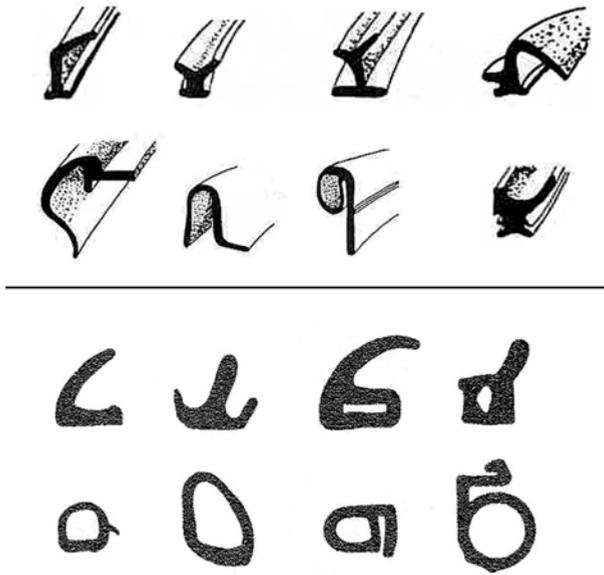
Examples of historical door weather strip sections. Above: compact rubber sections; below: foam rubber sections.
